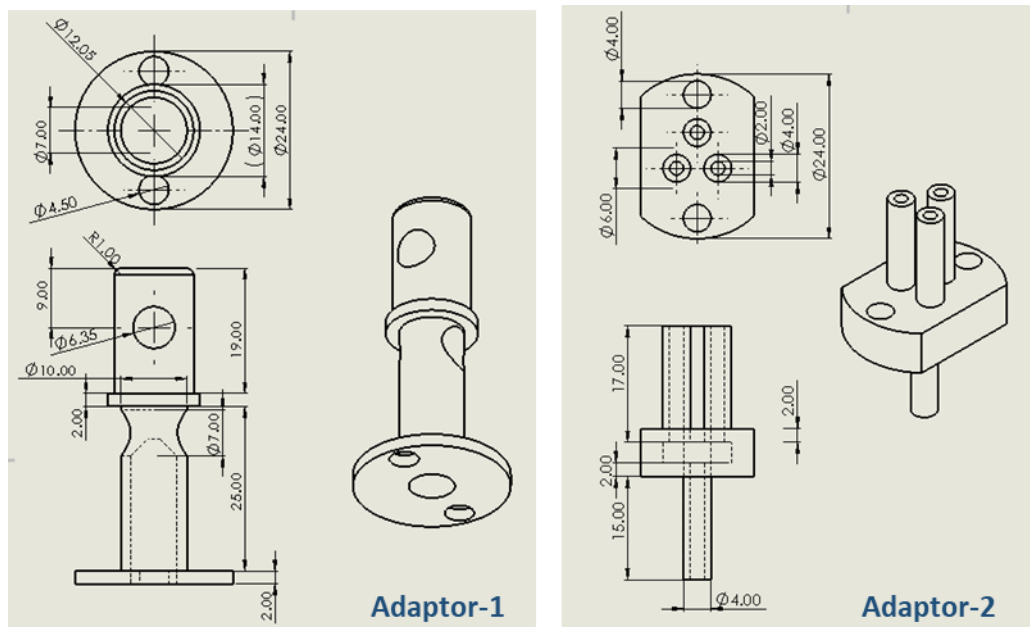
Detailed Mechanical Drawing of Adaptor-1 and Adaptor-2.
